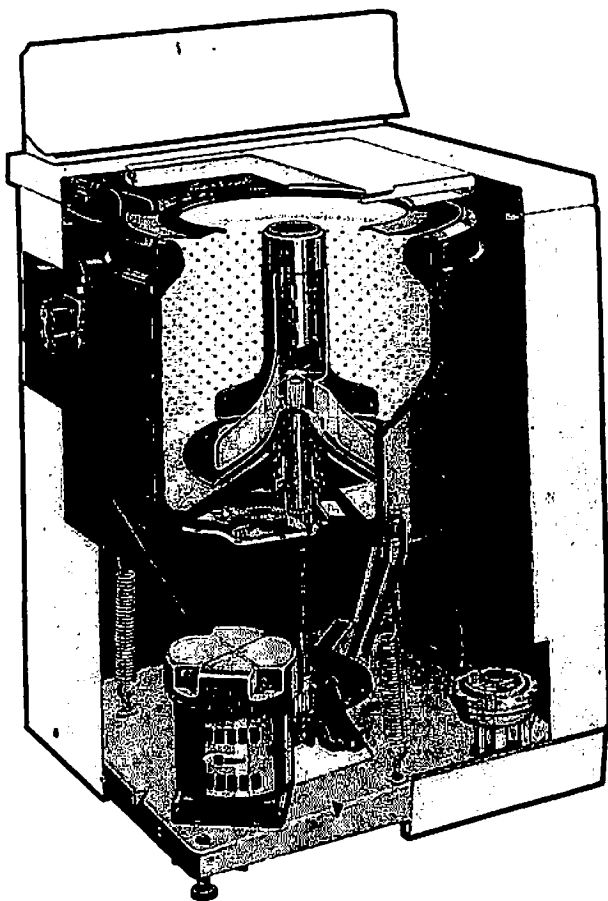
Example of gears in use (Courtesy The Maytag Company)
